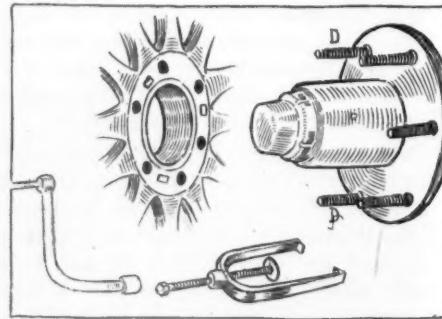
RAMBLER DEMOUNTABLE WHEEL
